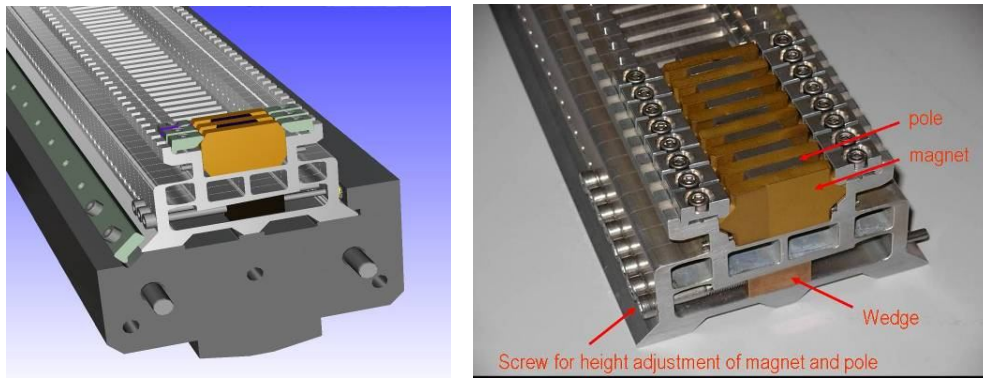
Design of block-keeper unit (left) and as manufactured (right)
